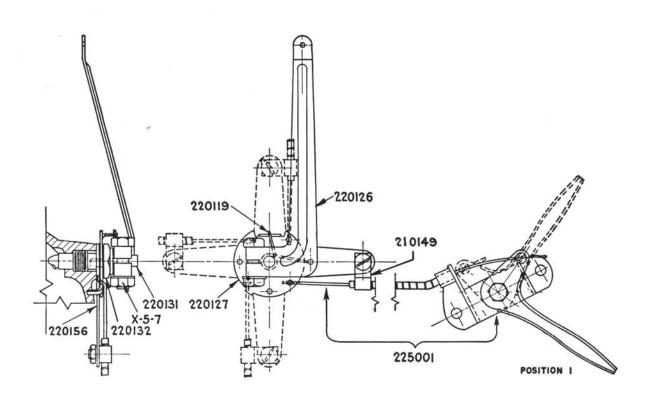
Hand Throttle Control Lever and Cable Kit 225000-A
